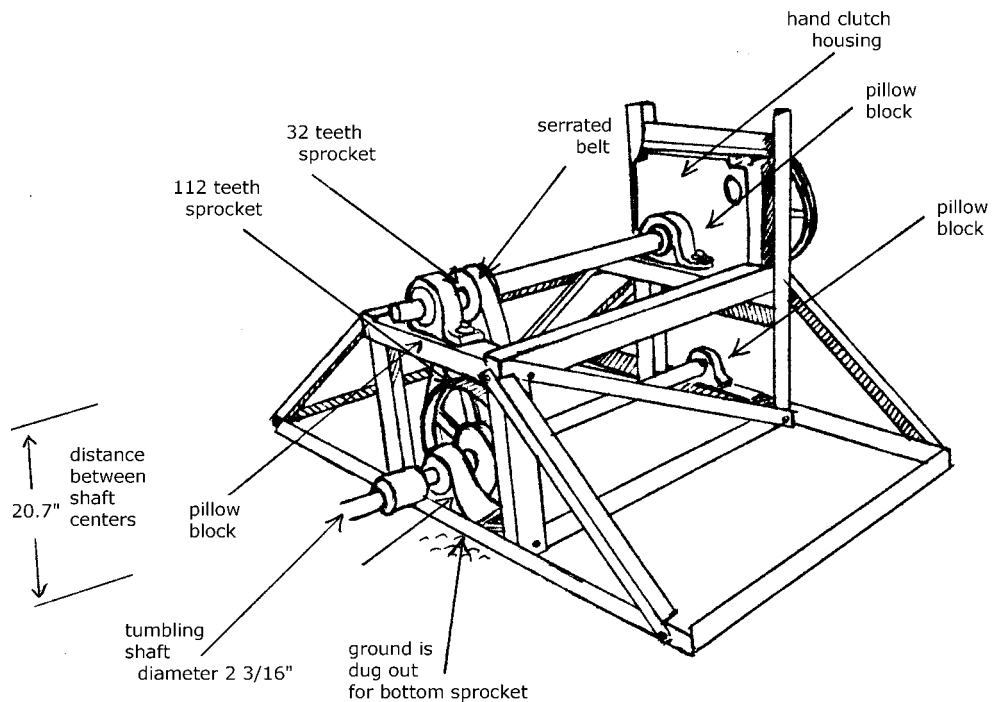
High-torque drive unit. T.B. Wood's HTD unit, shown here, uses serrated belt drive instead of chain.
